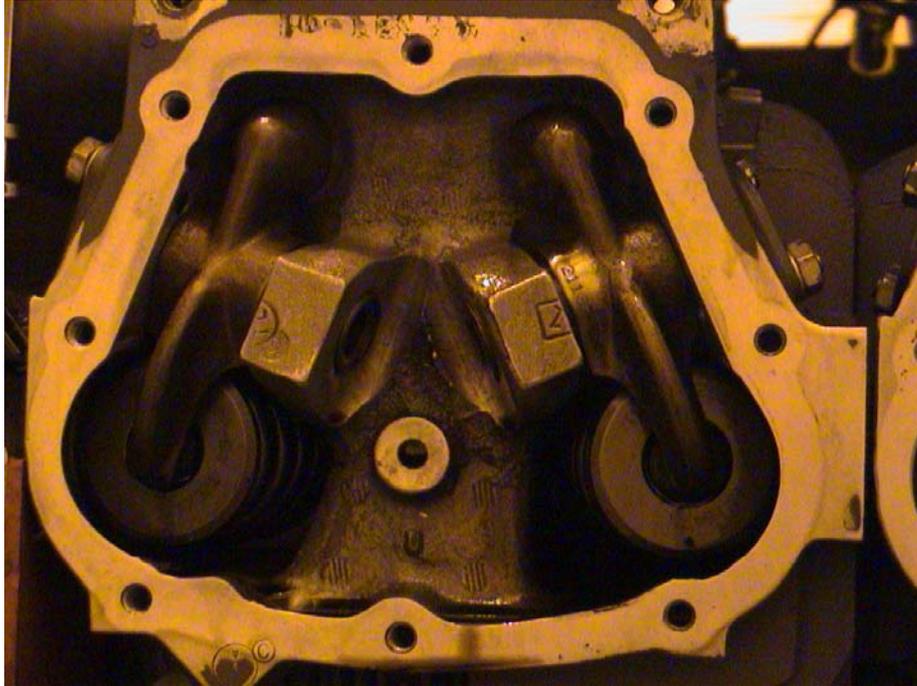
LYCOMING IO360-C CYLINDER WITH VALVE COVER AND GASKET MATERIAL REMOVED
